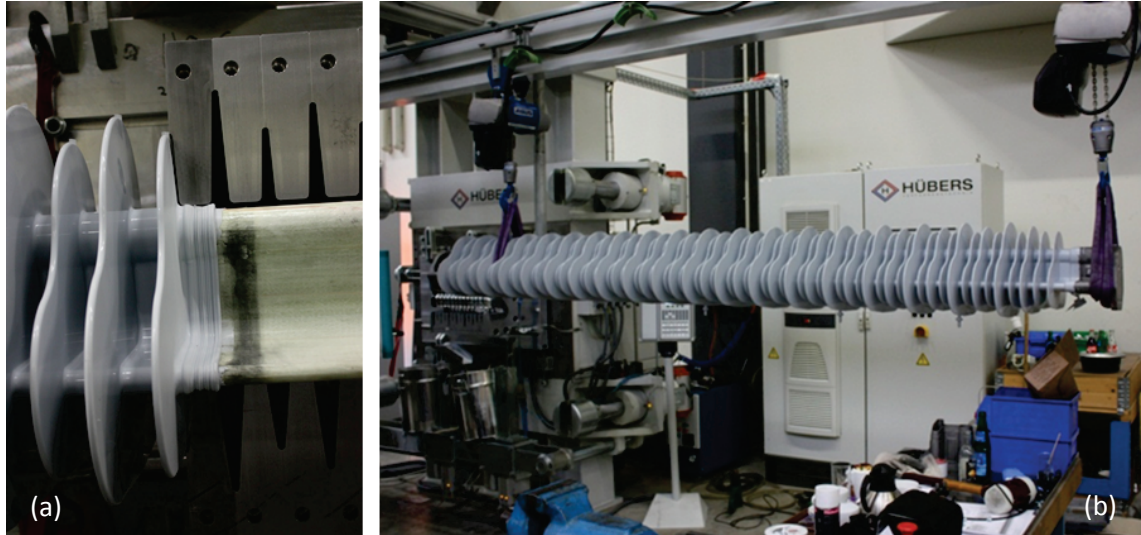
Liquid silicone injection moulding machine (a) and compression insulator mould (b)
